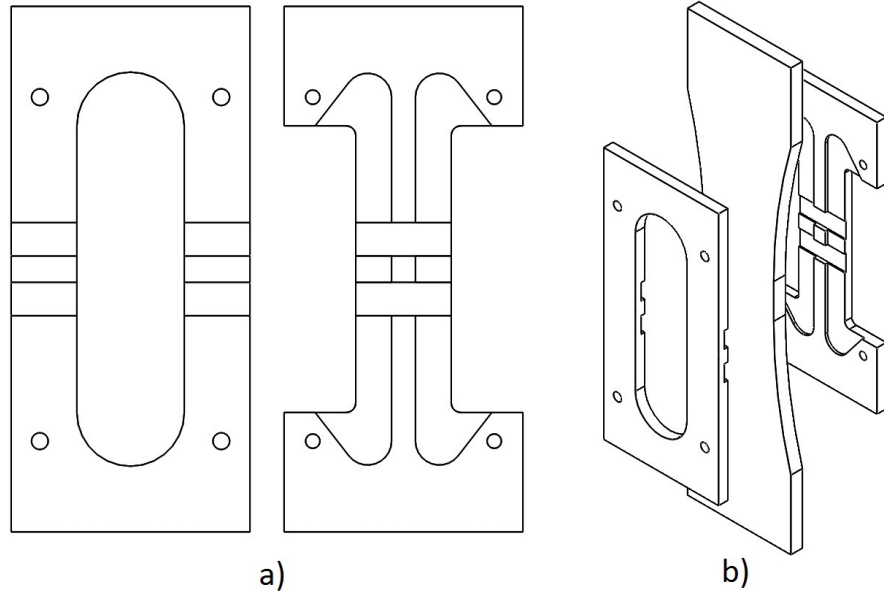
a) Geometries of the two opposing plates of the anti-buckling fixture, and b) exploded view of the assembly on fatigue specimen.
